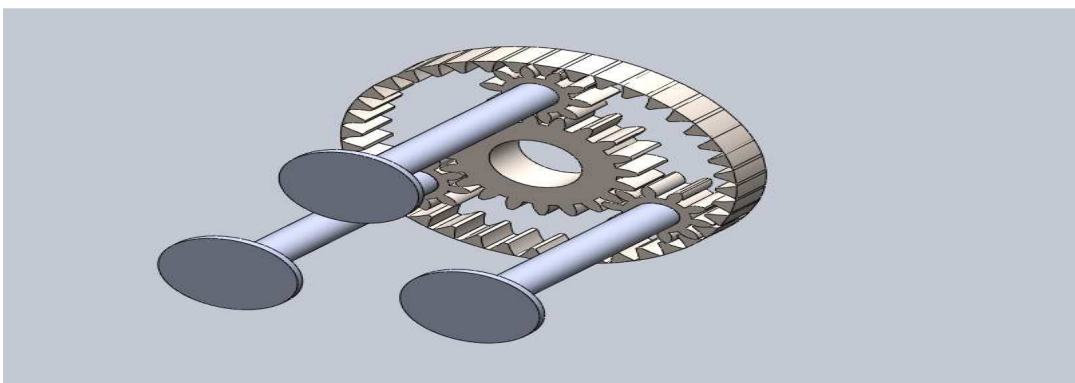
Actual Drawing Isometric View after Assembly (Mechanism for Lapping)
